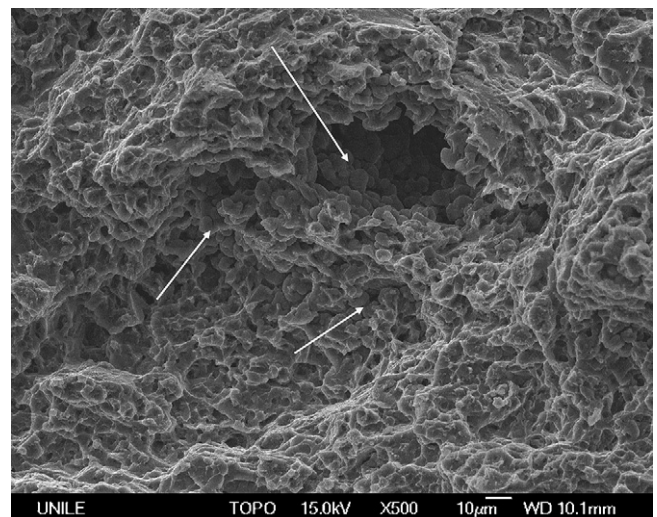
Fracture surfaces of the as-received tensile tested material showing voids and oxides formation.
